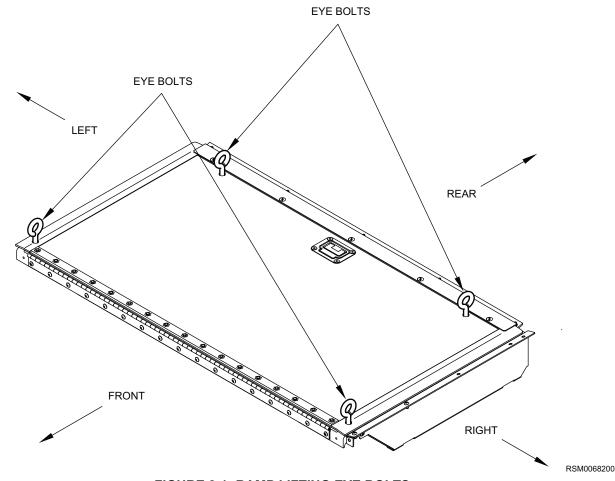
RAMP LIFTING EYE BOLTS
